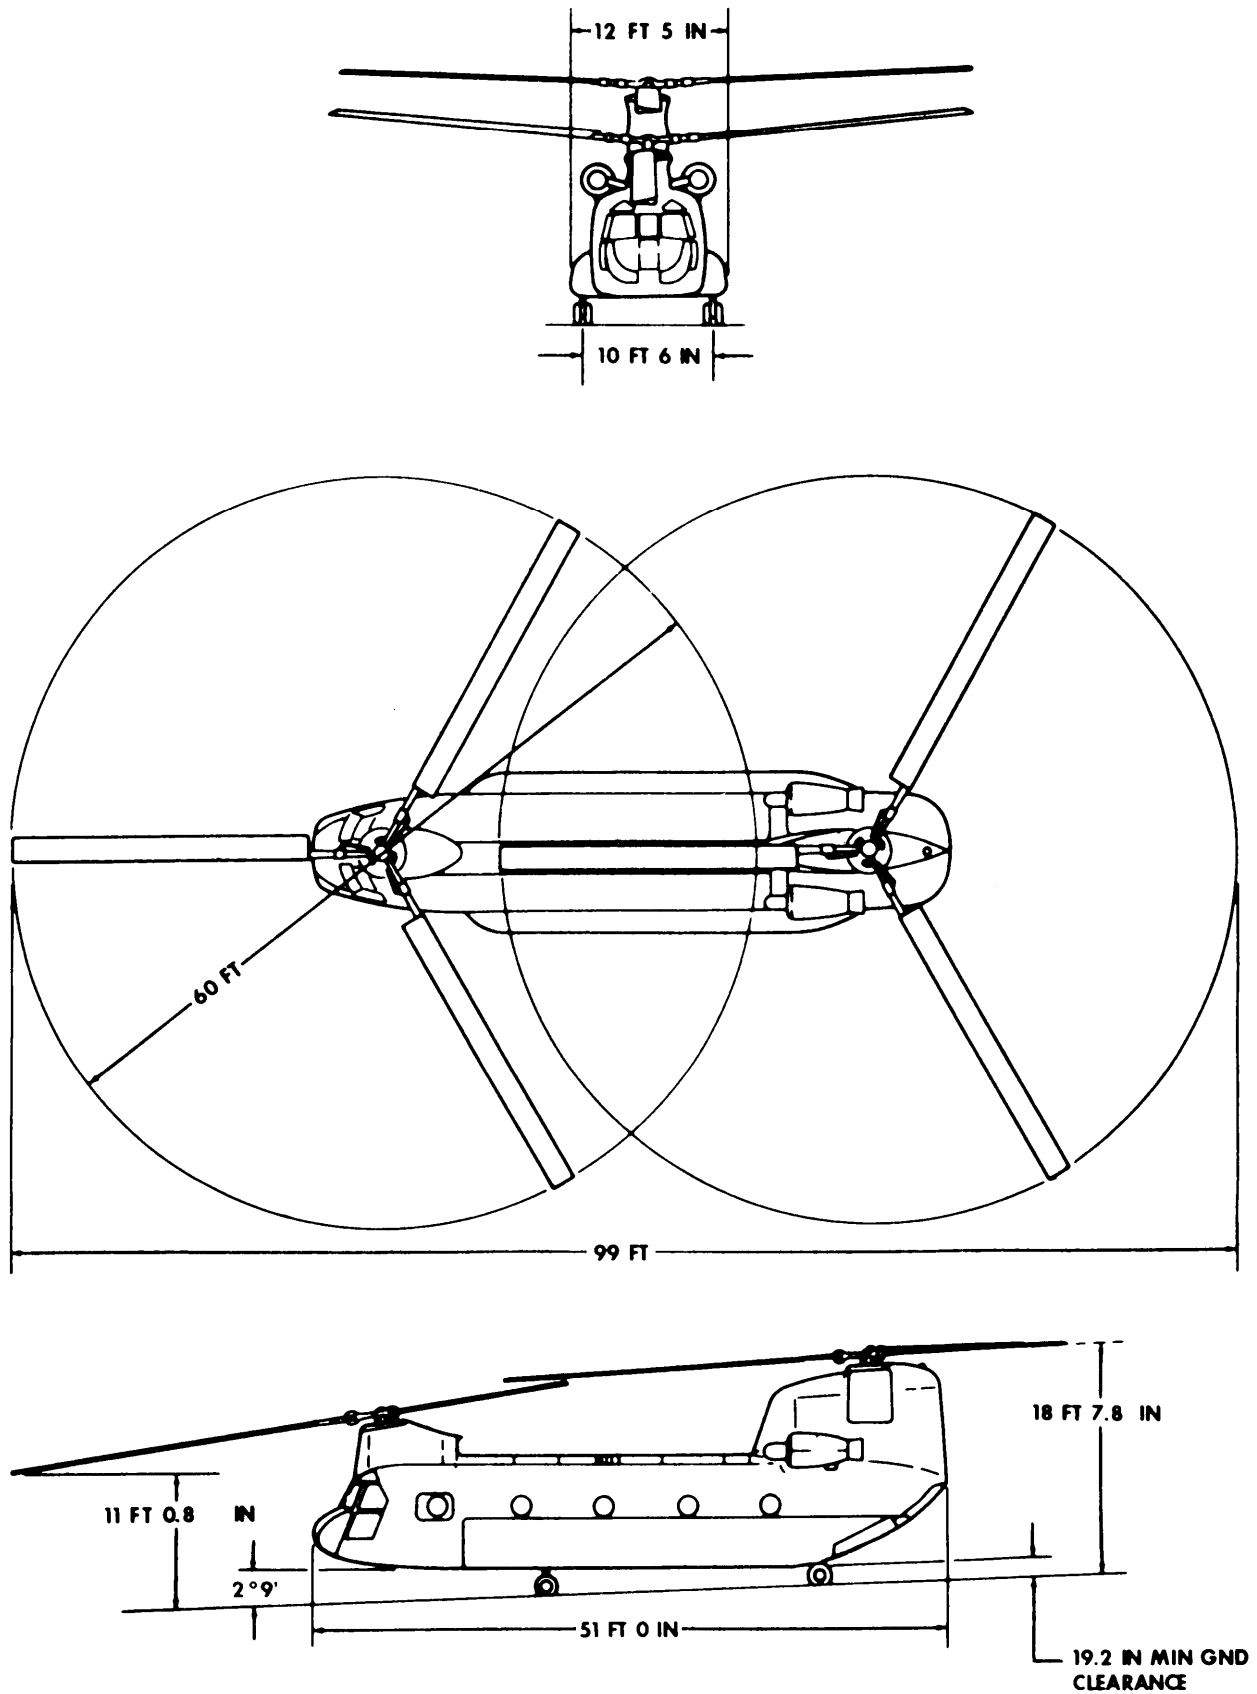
Principal dimensions, CH-47D (front, top, and side views).
